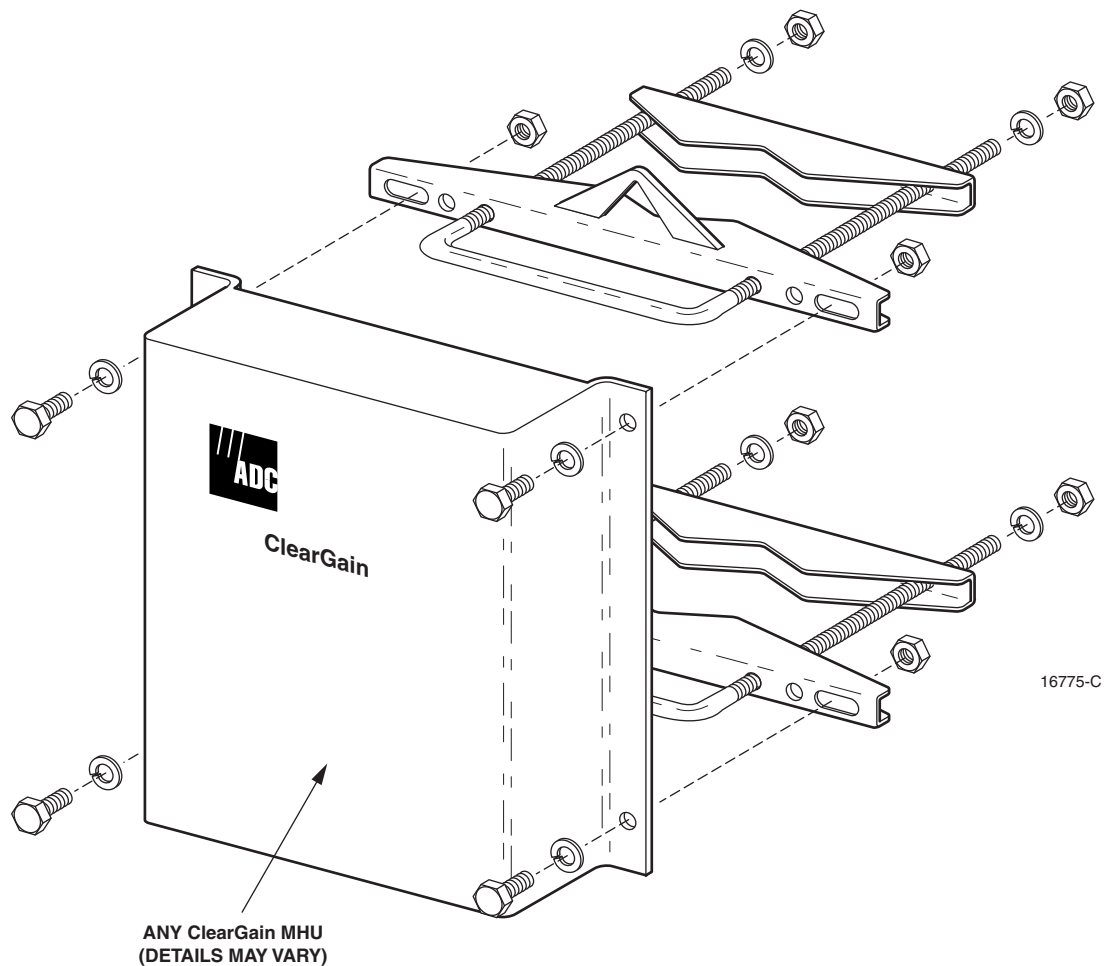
MHU Long Bolt Mounting Bracket Kit Components
